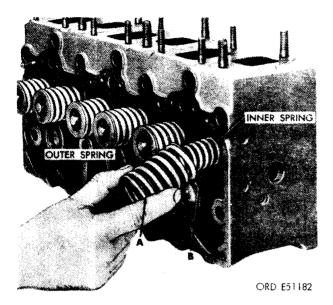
REMOVING OR INSTALLING EXHAUST VALVE INNER AND OUTER SPRINGS.
